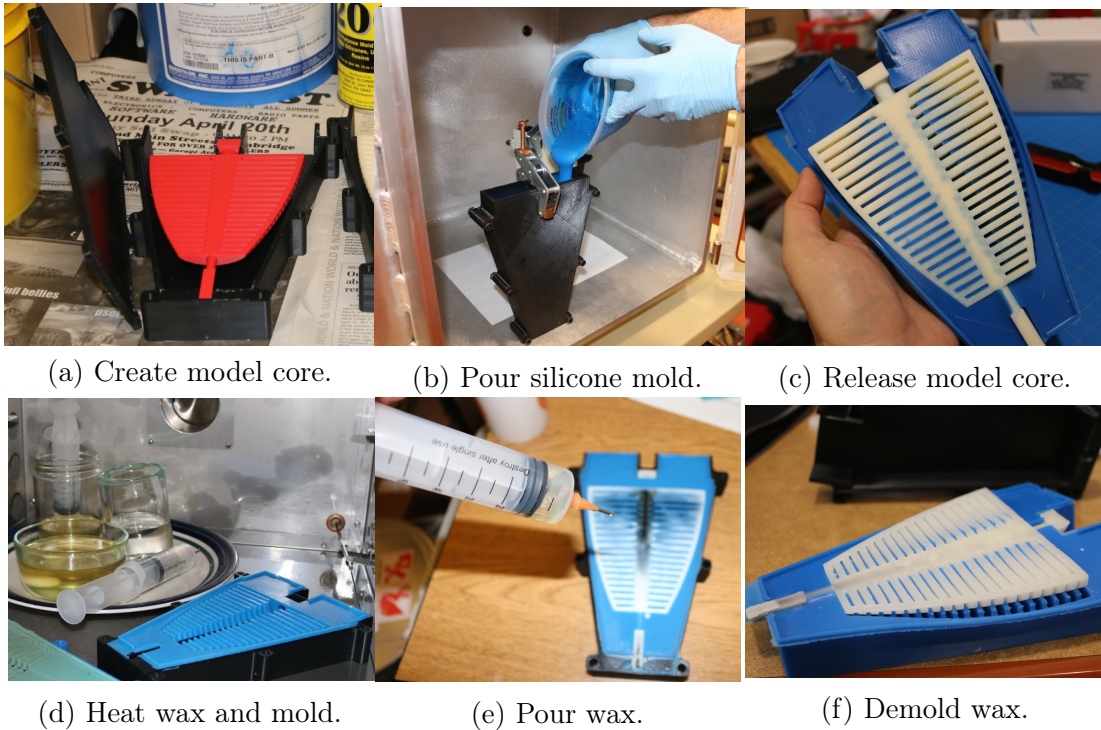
Wax core fabrication: (a) 3D print model core; (b) Create silicone mold for wax casting; (c) Release model core; (d) Heat beeswax and mold; (e) Pour wax with syringe; (f) Demold wax core. The figure is adapted from Katzschmann et al. [2014].
